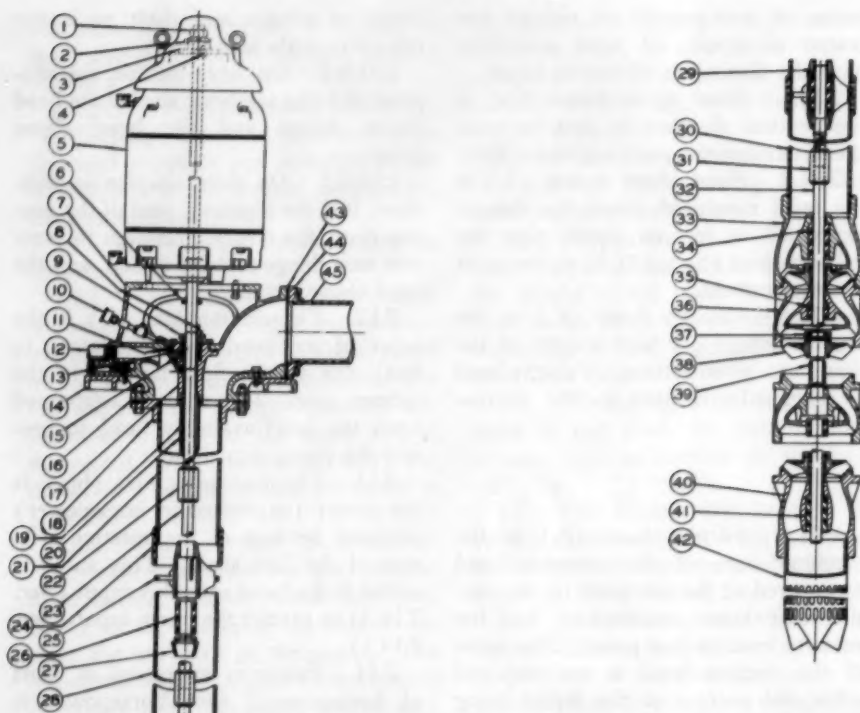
Open Line Shaft Pump (Surface Discharge, Threaded Column and Bowls)
